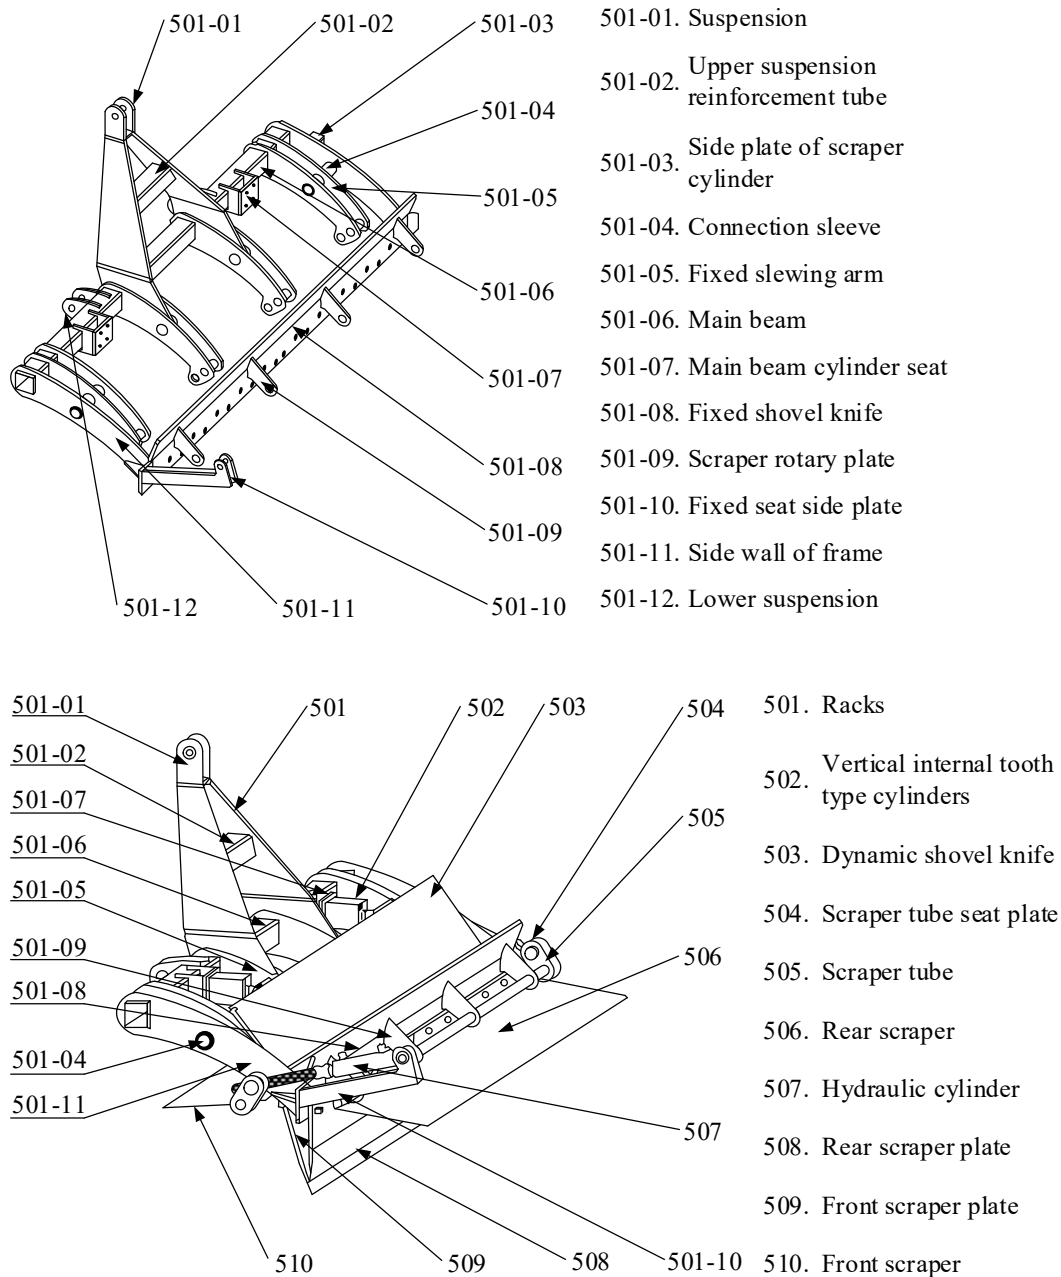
The self-walking horizontal laying machine is inserted into the knife head
